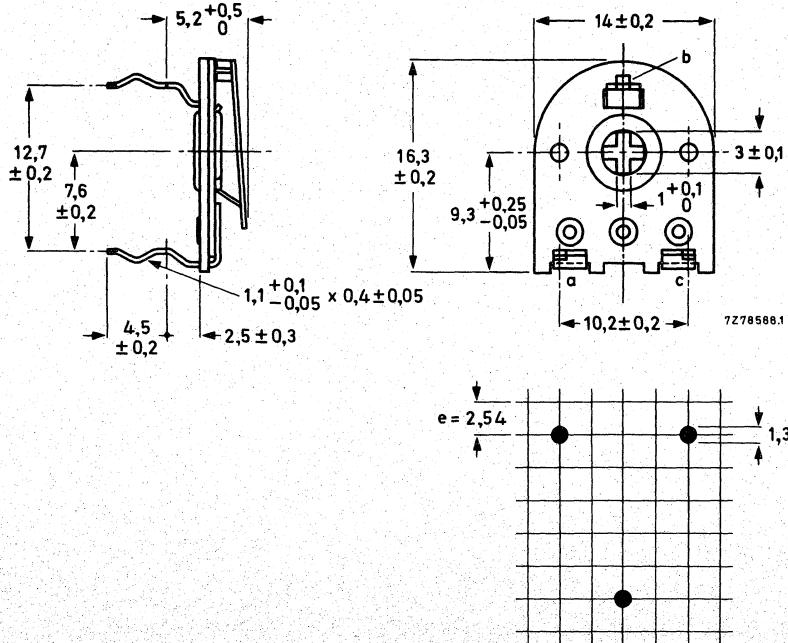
Potentiometer for horizontal mounting, with snap-in printed-wiring pins, 2322 409 033..
